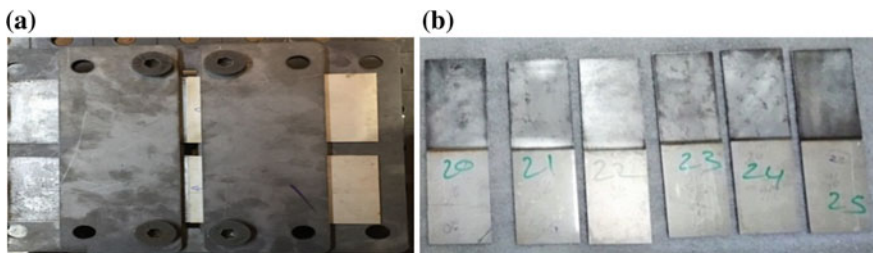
LBW workpieces: a position of workpieces and b welded joints
